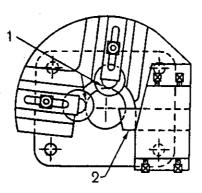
Roller steady box 1. Roller, 2. Tool
